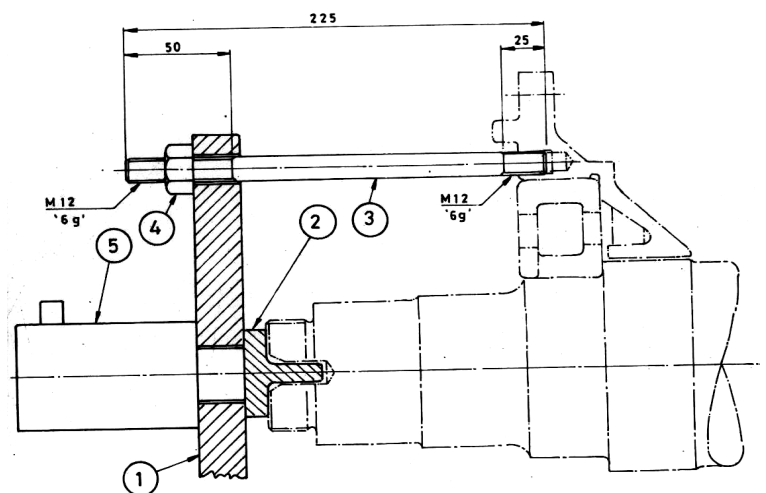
EXTRACTOR FOR CE BEARING AND CARTRIDGE (Tool No. 1405391)
